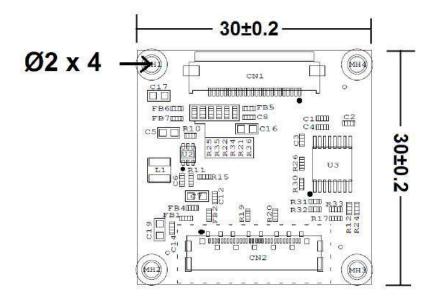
Front View of e-CAM50_CUiMX8 Ixora Adaptor Board Mechanical Dimensions
